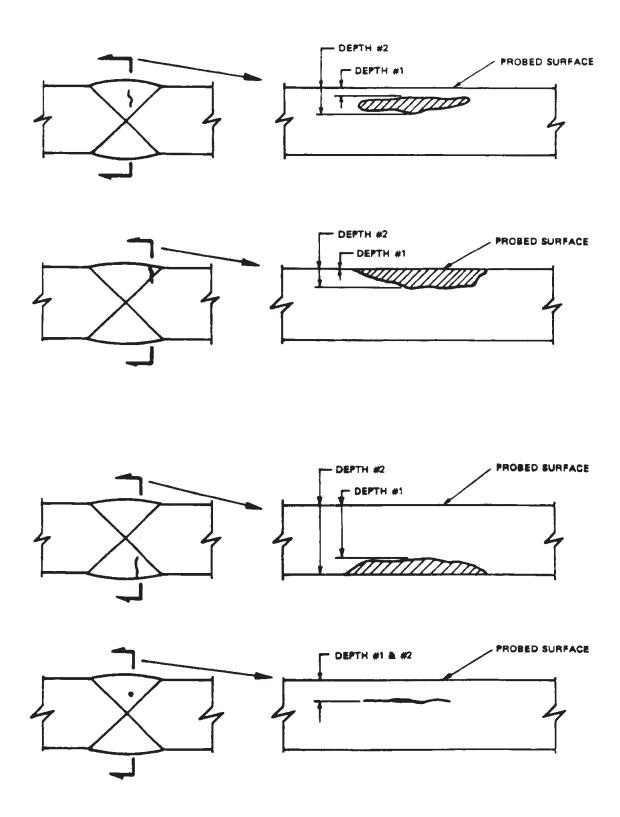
Depth Recording of Butt Weld Discontinuities
